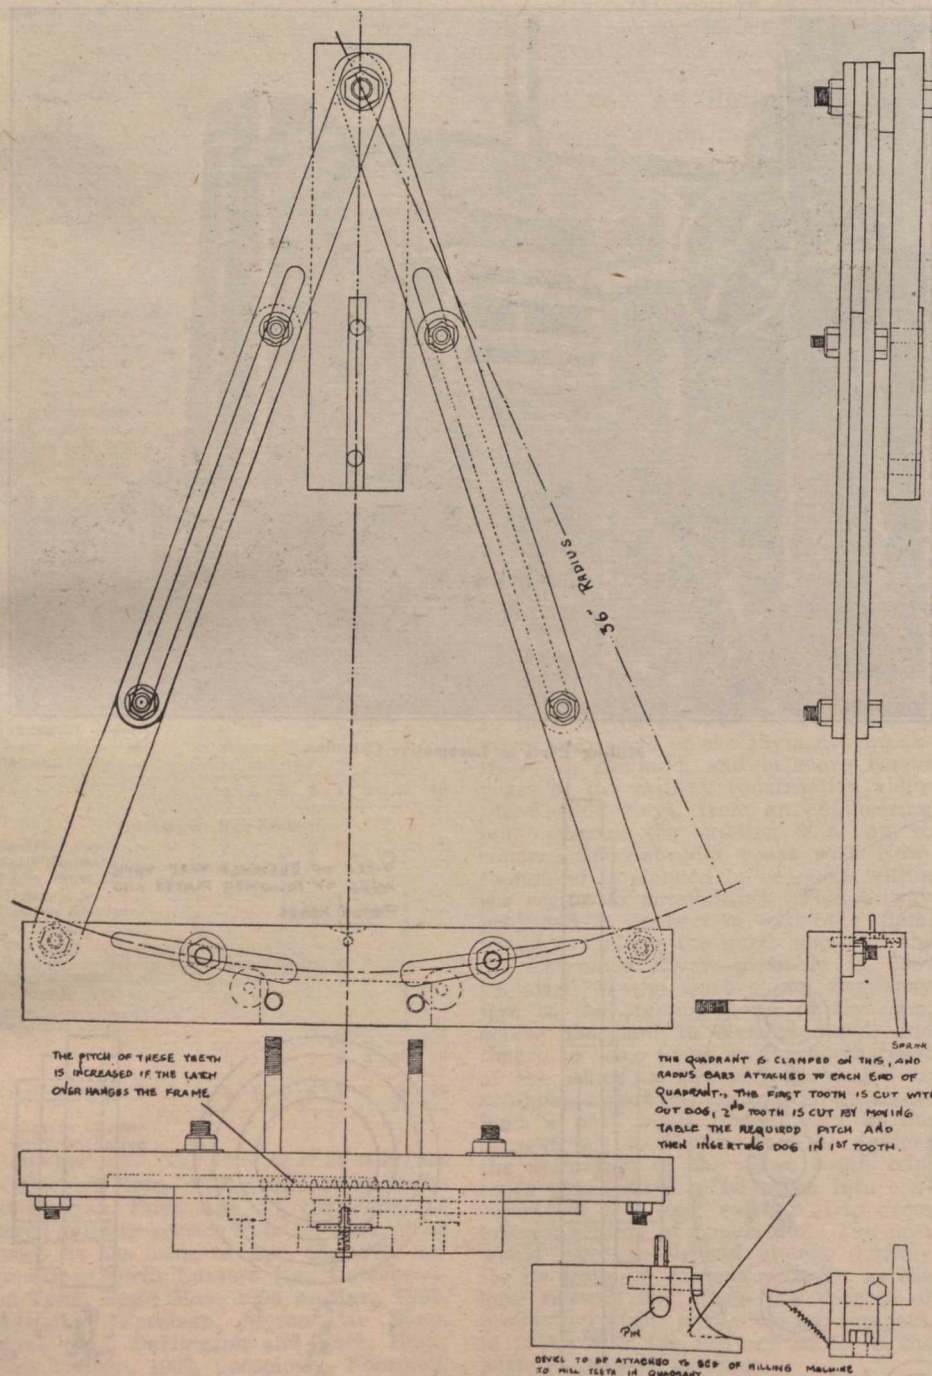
Jig for milling teeth in reverse lever latch and quadrants.
